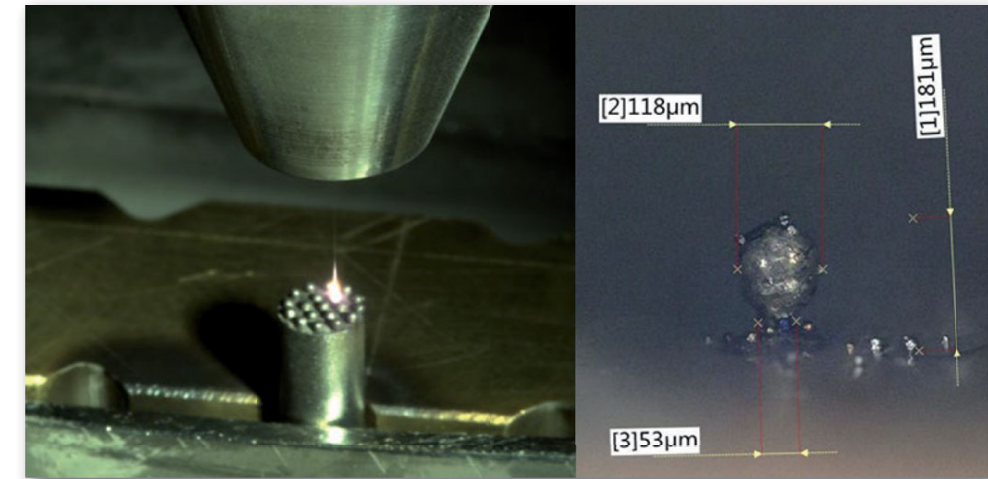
Additively formed pin shaped structures (316L, <200µm) on test tubes (P.A.N.A.C.E.A.) manufactured by Laser Metal Deposition (LMD) to improve interlocking of multi-material compound.
